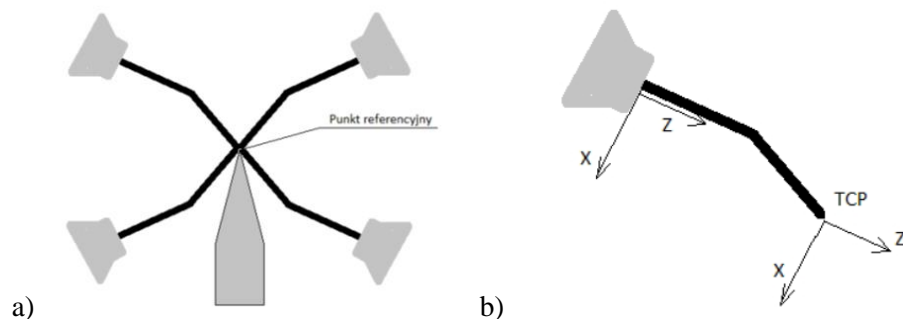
a) manual 4 points calibration method, b) TCP location in welding torch.
